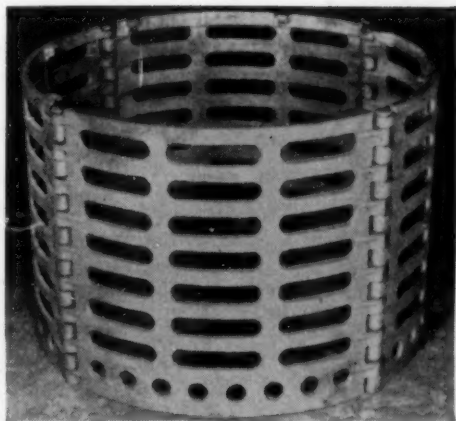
HEAT RESISTING ALLOY CONTAINER FOR MALLEABLE CASTINGS. INSIDE DIMENSIONS: $24\frac{1}{2}$ -IN. DIAMETER, $16\frac{3}{8}$ -IN. DEEP.
